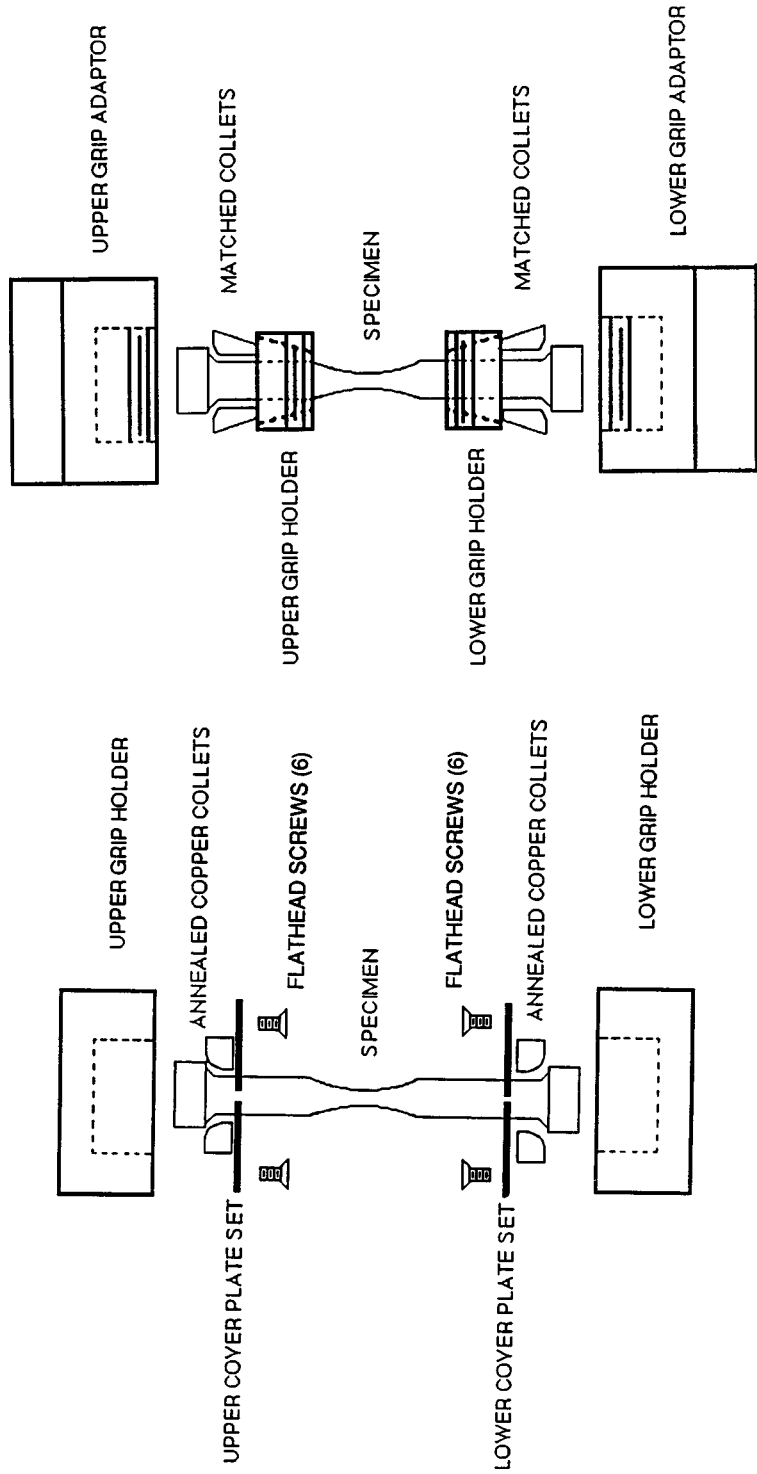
Examples of Straight- and Tapered-Collet Passive Gripping Systems for Cylindrical Specimens (4)
